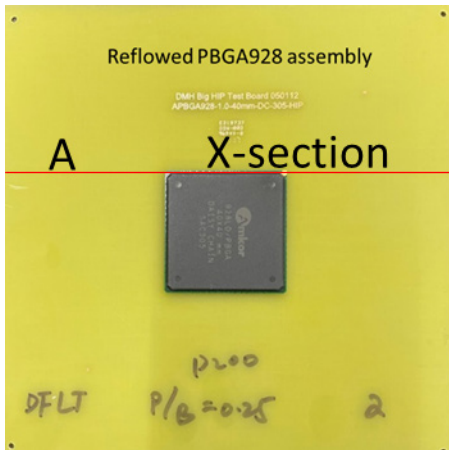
Example Image of the Reflowed Assembly with Indicated Cross Section for Microscopy.
